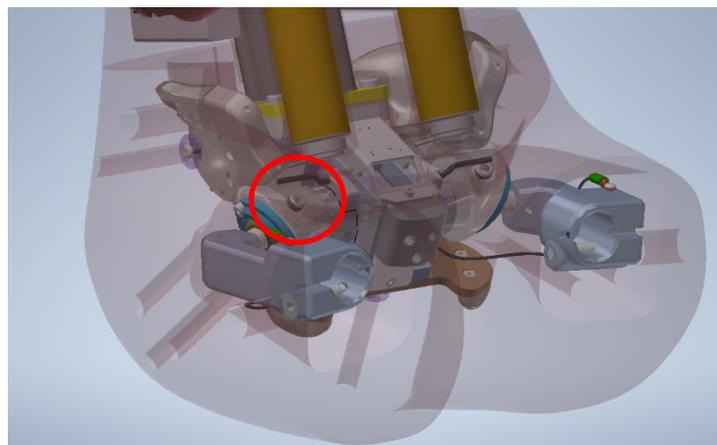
Pelvis assembly showing pelvic plunger assembly (circled)
